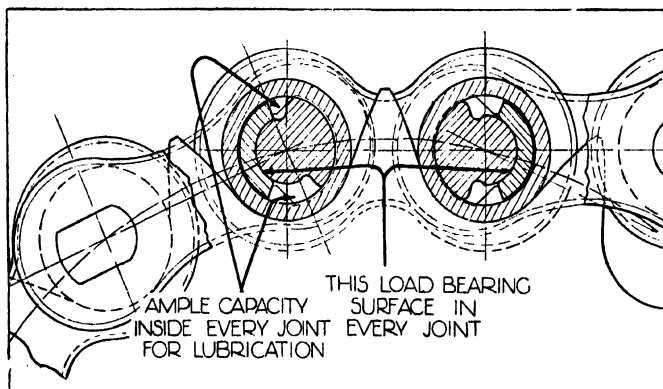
Morse Segmental Bush Roller Chain Section.
